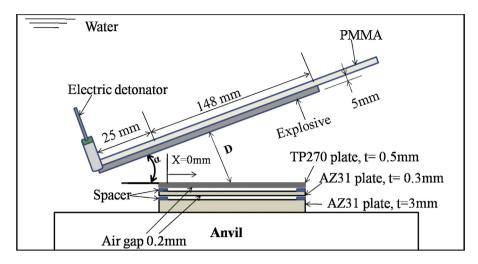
Experimental setup for three layers explosive welding, using of underwater shock wave technique.
